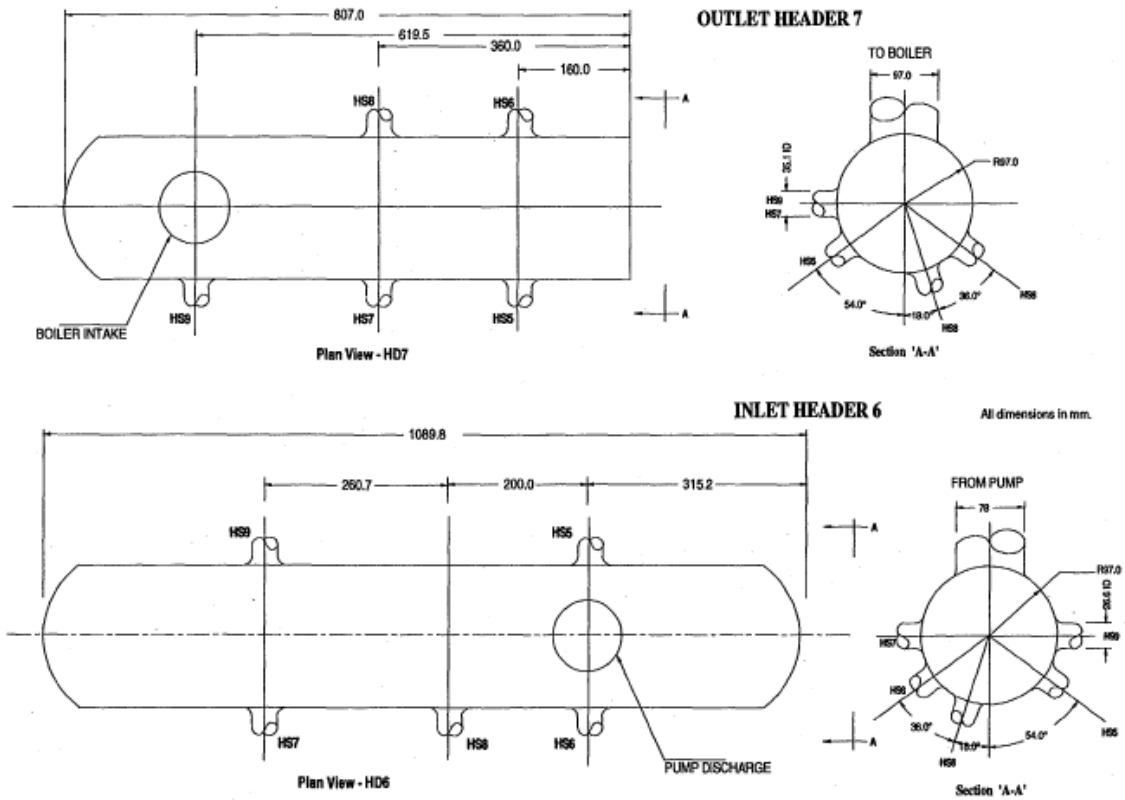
Outlet Header 7 and Inlet Header 6 in RD-14M
